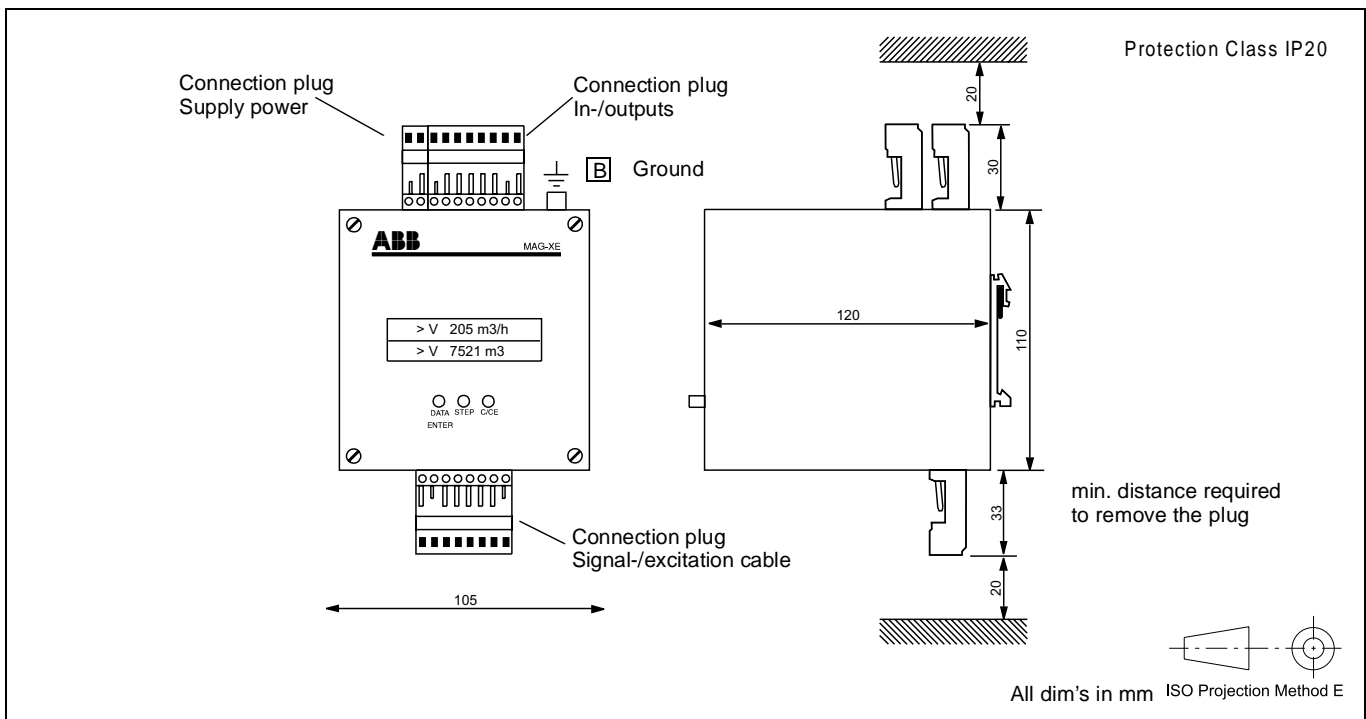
Dimensions, Converter E4 in Rail Mount Housing for Operation with Flowmeter Primary Models DE46, DE26
